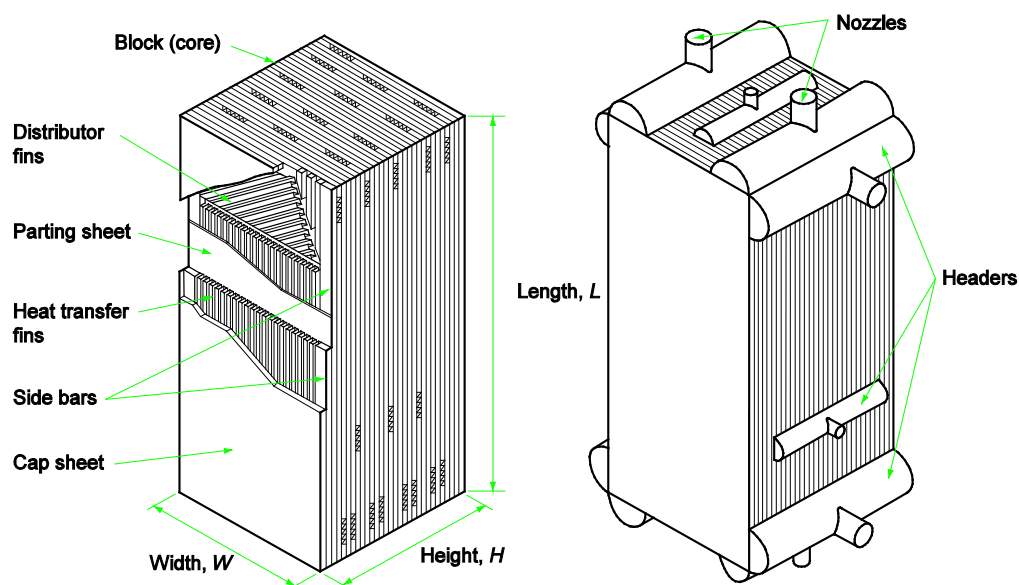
Components of a brazed aluminium plate-fin heat exchanger
